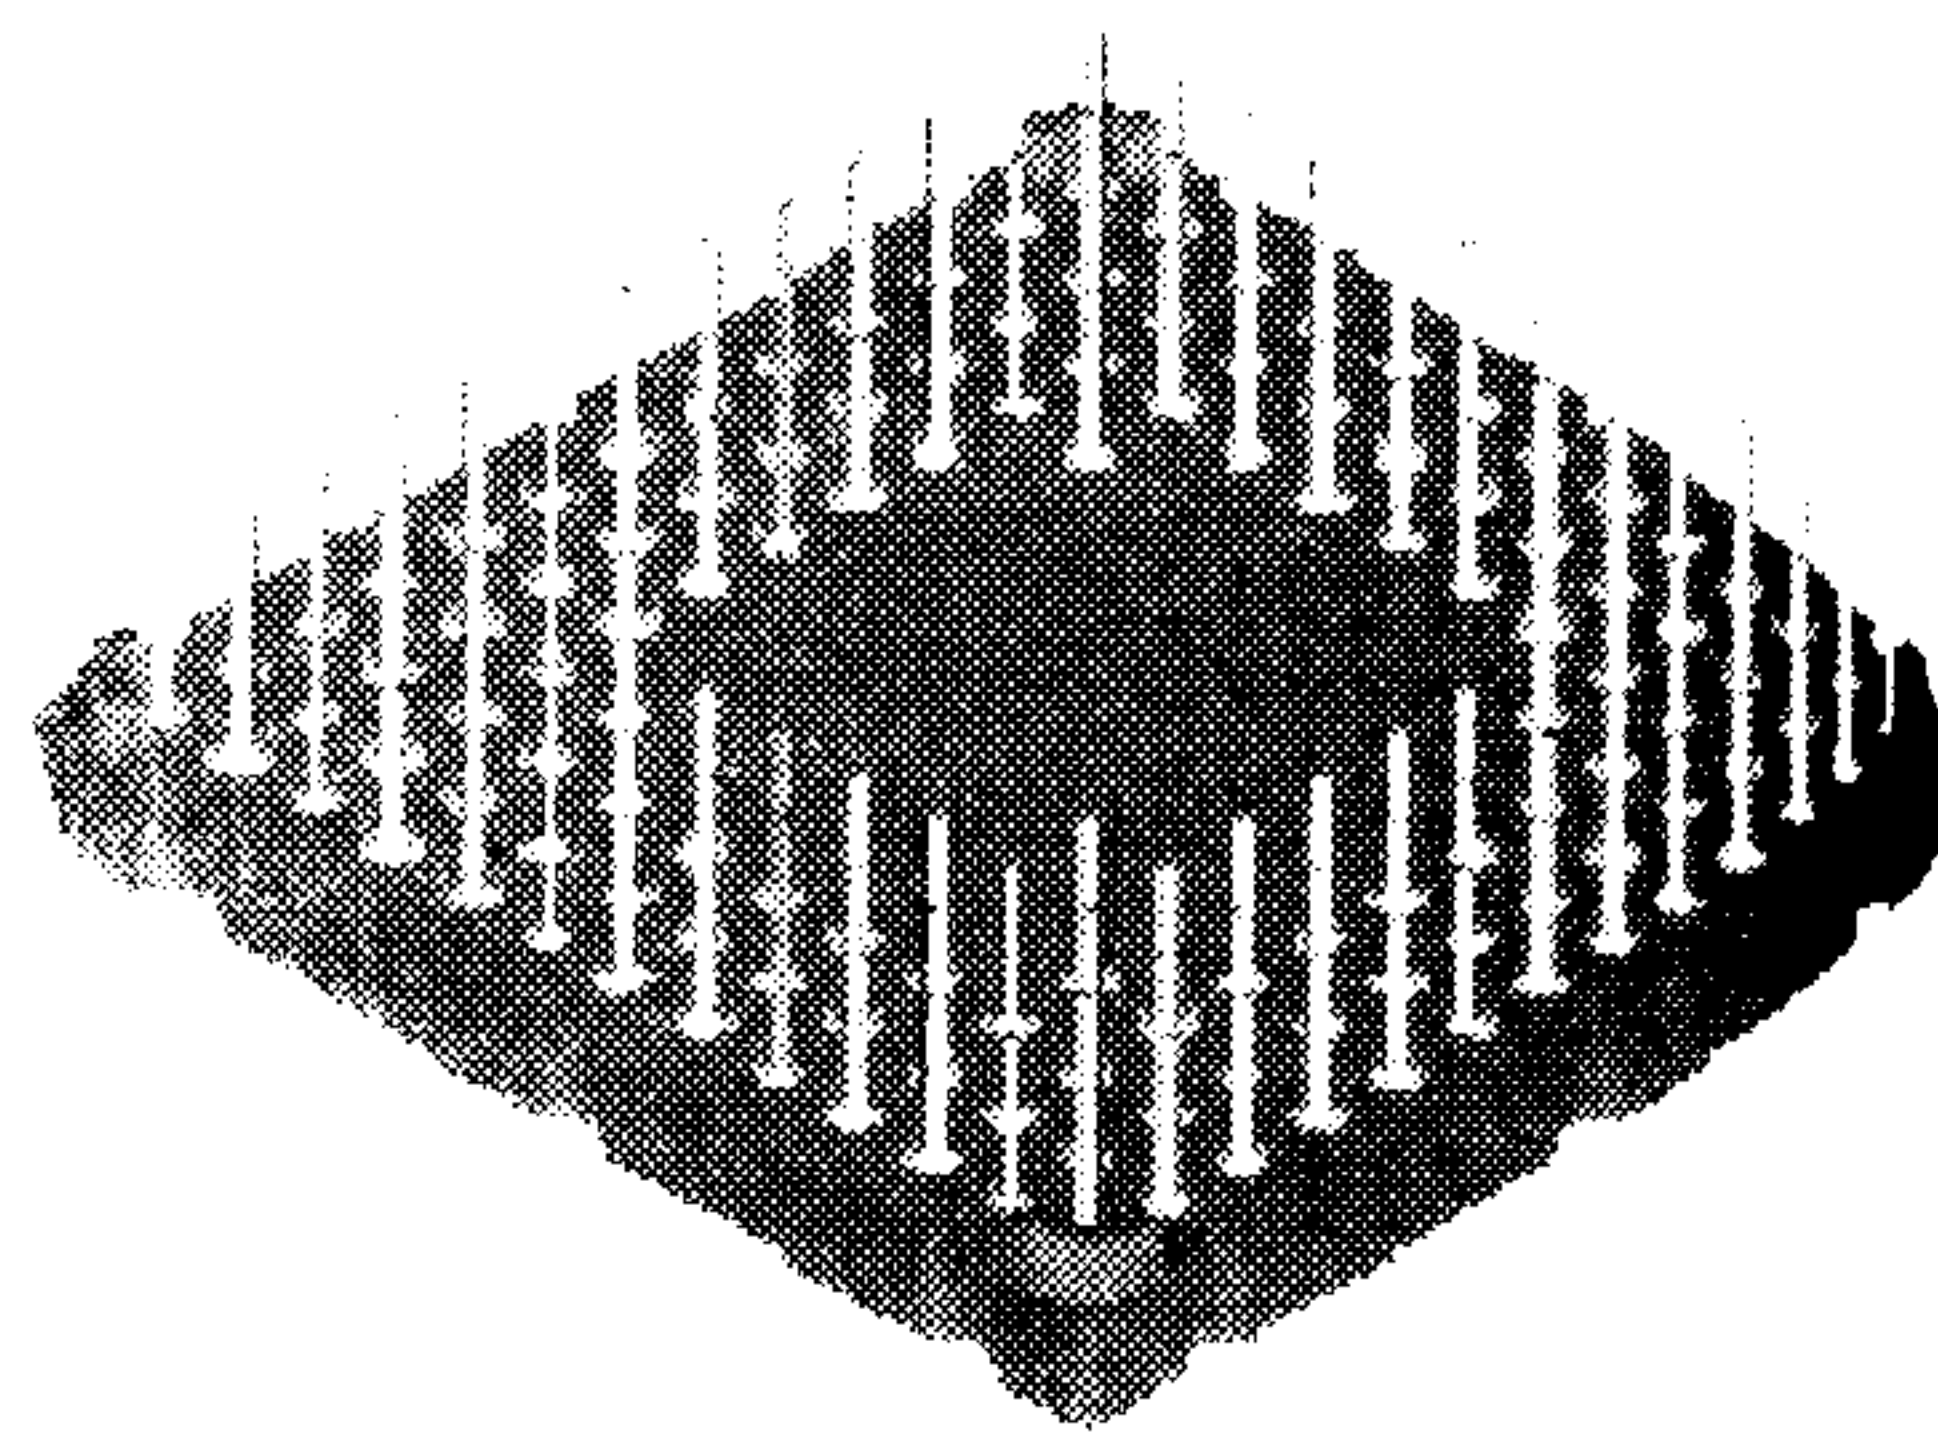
Photograph of a pin-grid-array (PGA) showing pins deployed over the bottom surface of the chip carrier.
